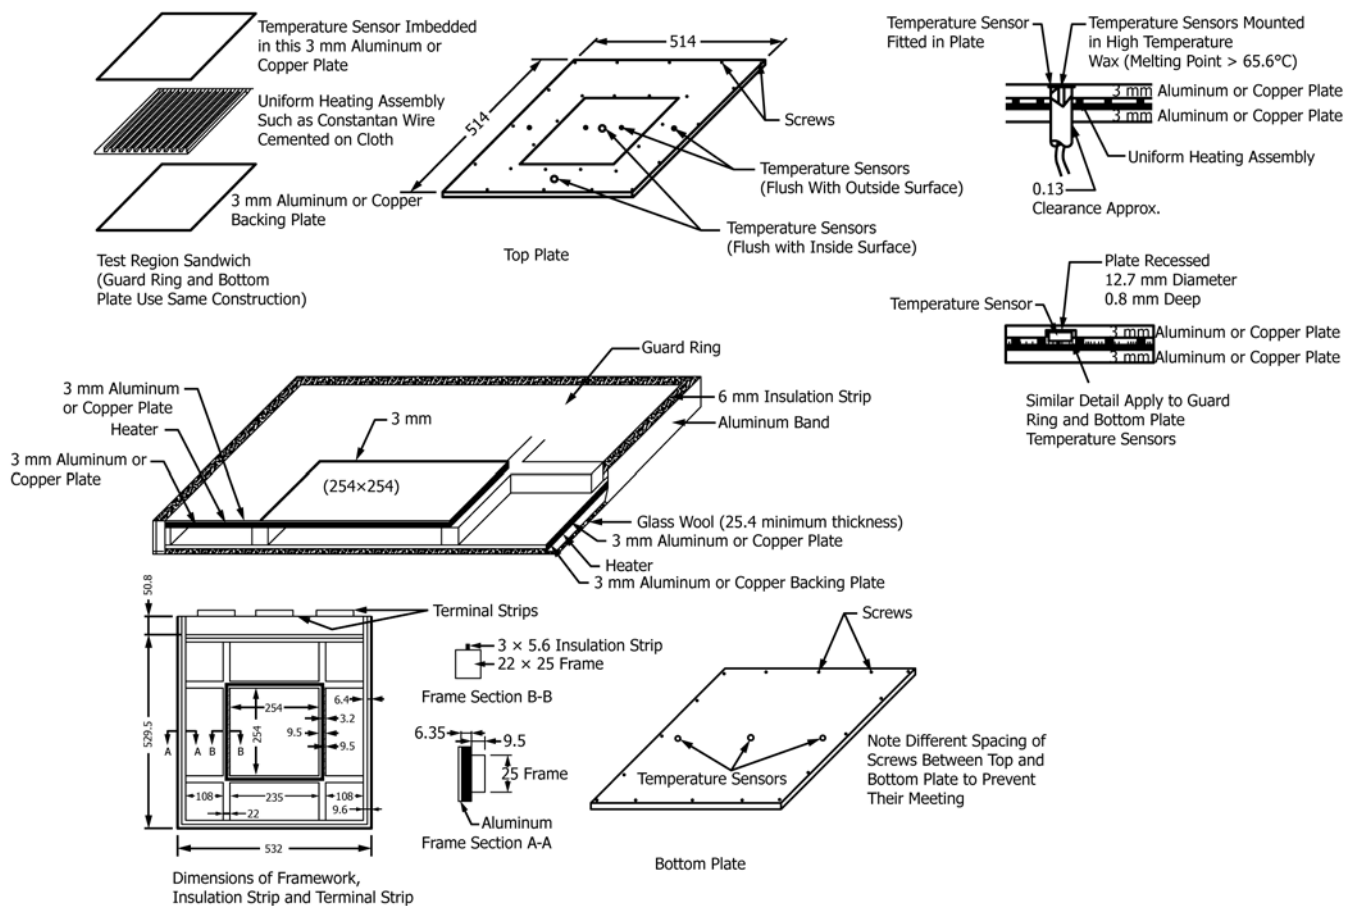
Example of a Hot Plate Apparatus, Dimensions in mm
